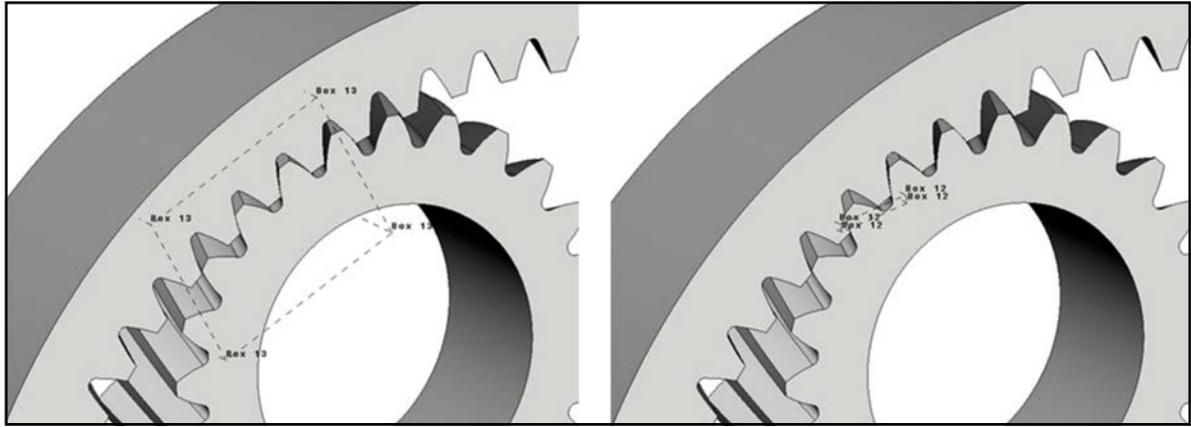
Refinement boxes at planet—ring gear mesh; (a) root fillet; (b) plane of action.
